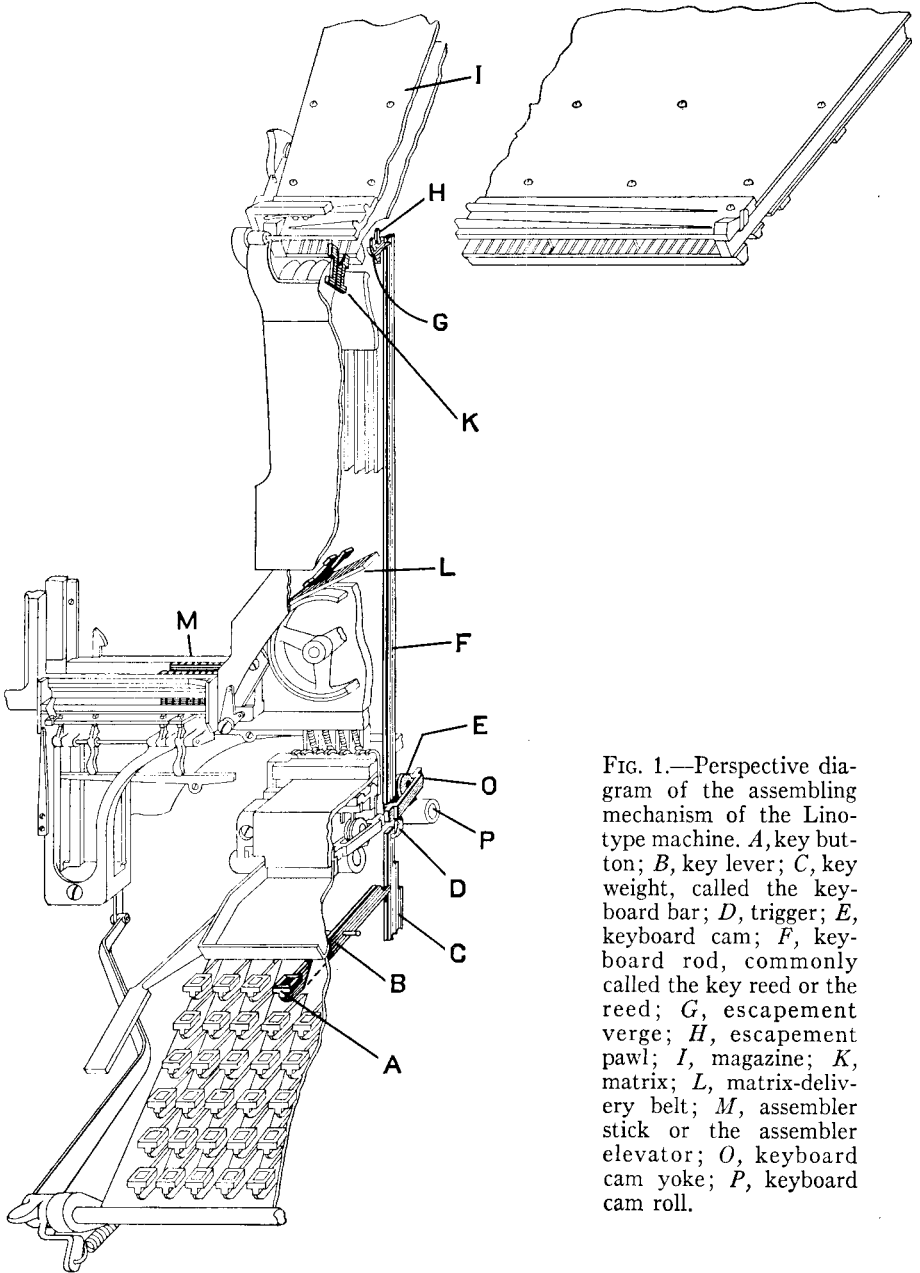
Perspective diagram of the assembling mechanism of the Linotype machine. *A*, key button; *B*, key lever; *C*, key weight, called the keyboard bar; *D*, trigger; *E*, keyboard cam; *F*, keyboard rod, commonly called the key reed or the reed; *G*, escapement pawl; *H*, escapement verge; *I*, magazine; *K*, matrix; *L*, matrix-delivery belt; *M*, assembler stick or the assembler elevator; *O*, keyboard cam yoke; *P*, keyboard cam roll.
